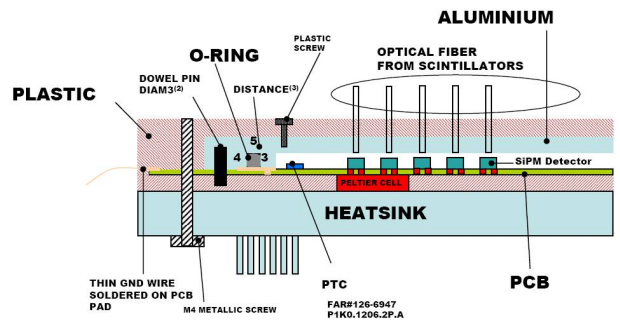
Schematic view of the final assembly of fiber connector and SiPM board
